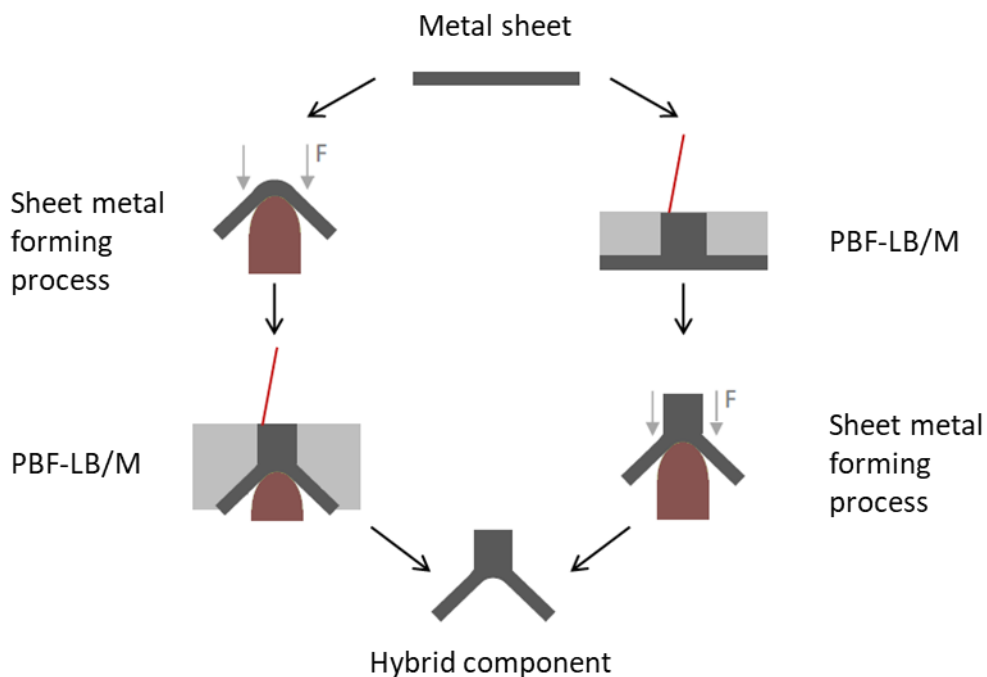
Different strategies to manufacture hybrid components combining sheet metal forming and PBF-LB/M. According to [8].
